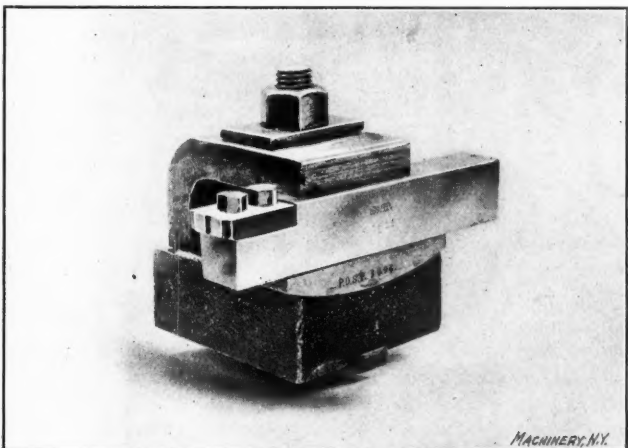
Separate Blade Formed Tool, with Open Faced, Rocking Holder
